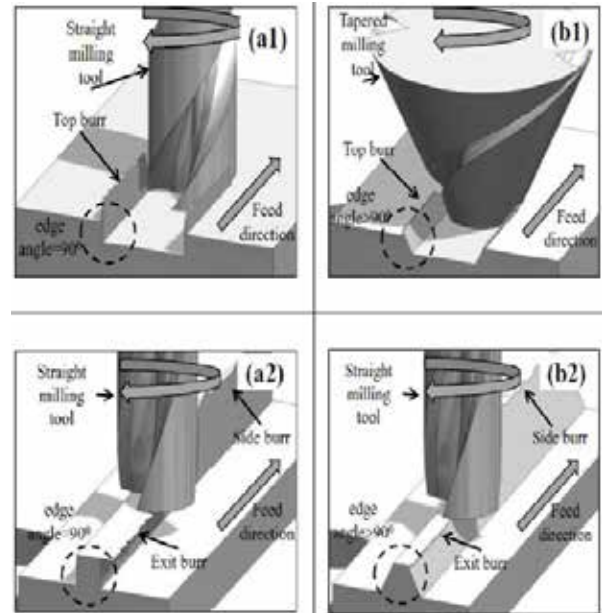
a1)Slot micromilling with straight tool, a2)Finish face milling with straight tool, b1)Slot micromilling with tapered tool, b2)Finish face milling with tapered tool [12]
